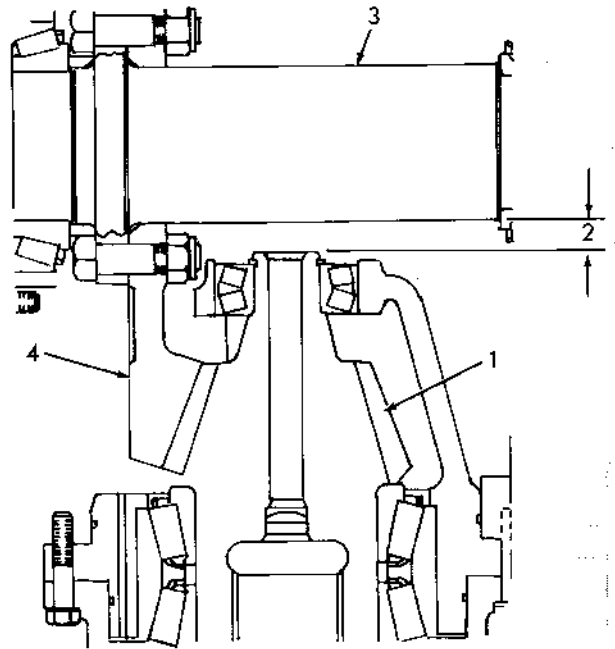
MEASURING MOUNTING DISTANCE T-85001
